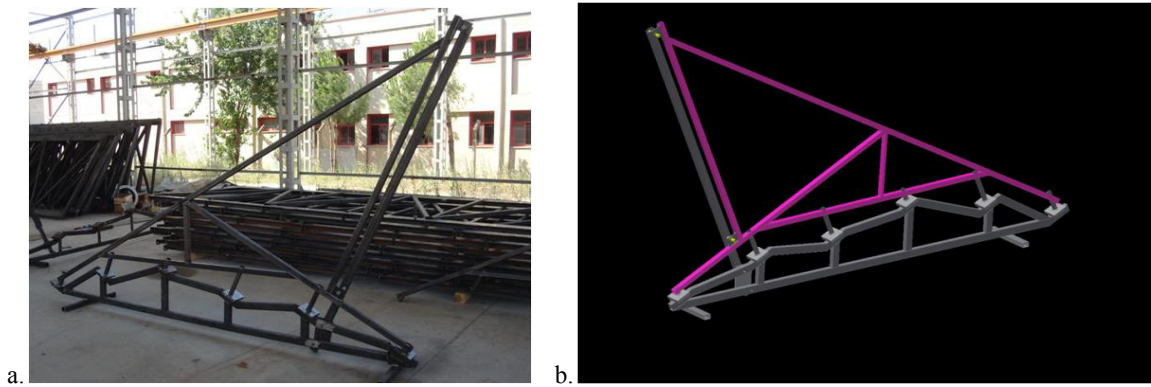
Cantilever arm in go-no-go checking jig: a. checking jig in use; b. design of checking jig (cantilever arm in pink)
